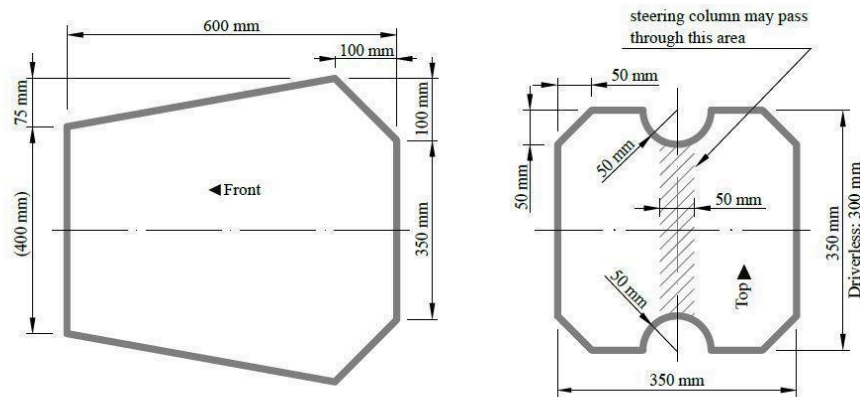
Cockpit opening and Cockpit Internal Cross Section template
